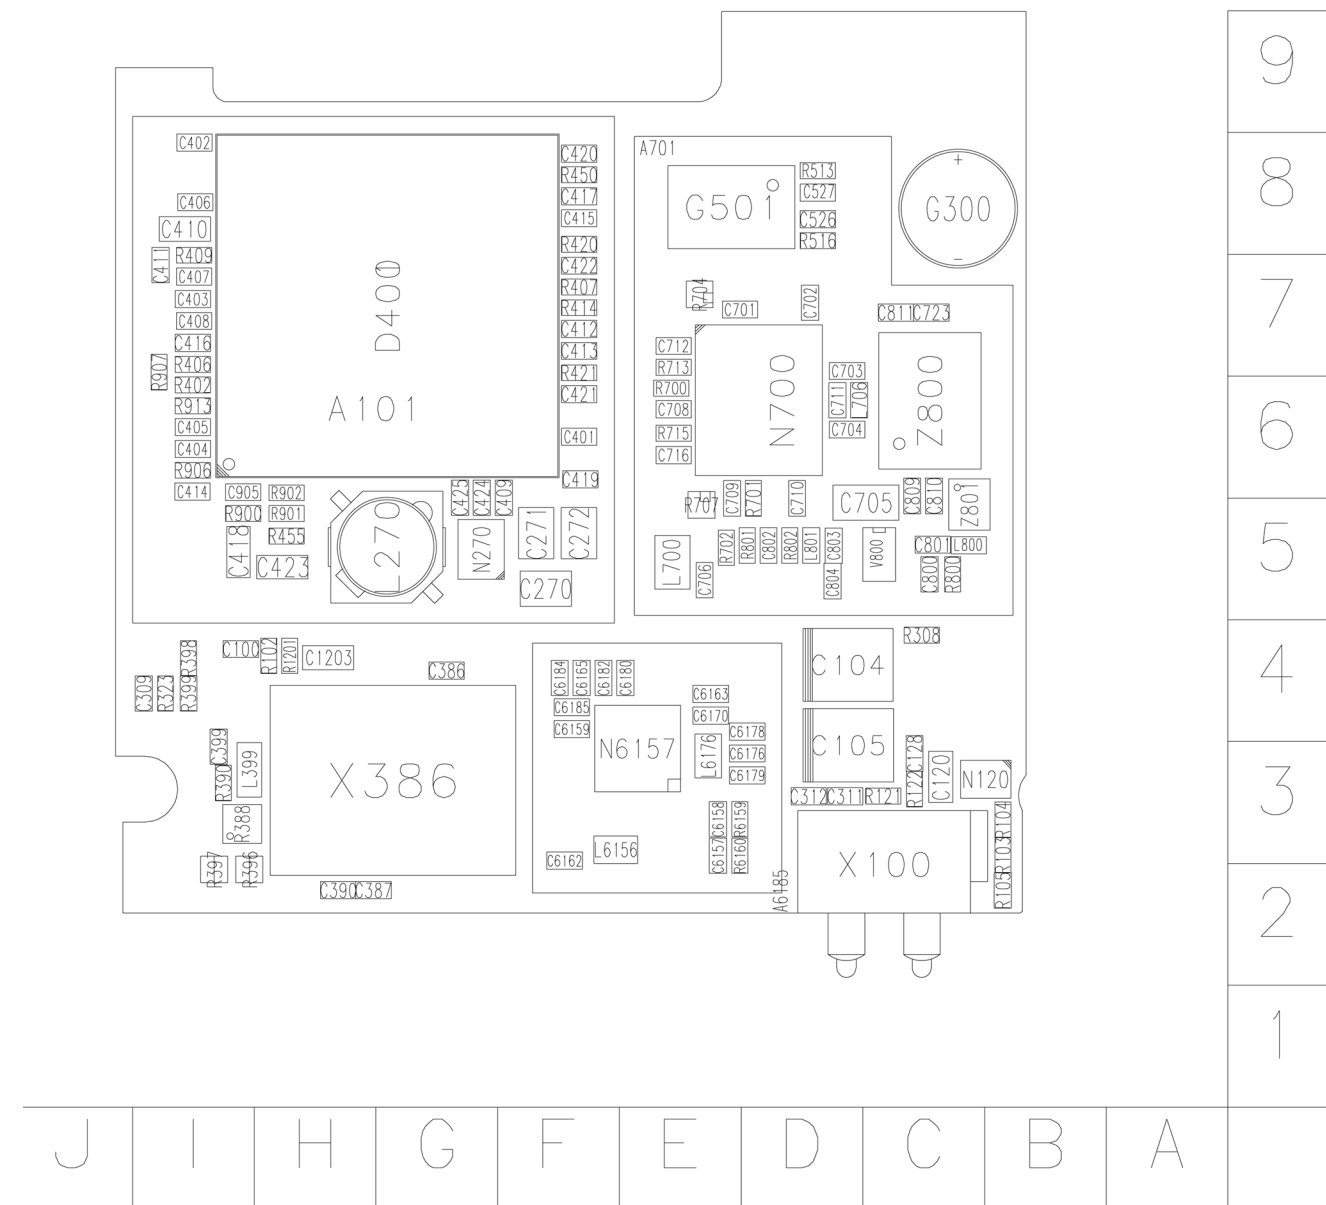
RM-13/33 Component layout 1eaa_11a/b, bottom side
